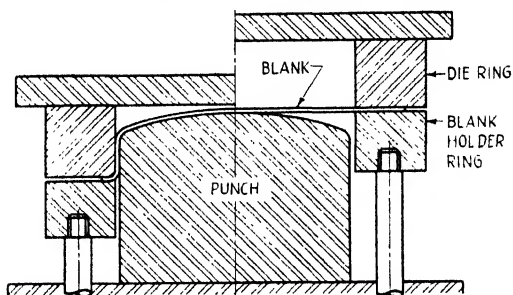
In a part which is shaped, as in this case, largely by the punch and in which drawing starts at the center, an irregular and unsightly appearance is likely to result.
